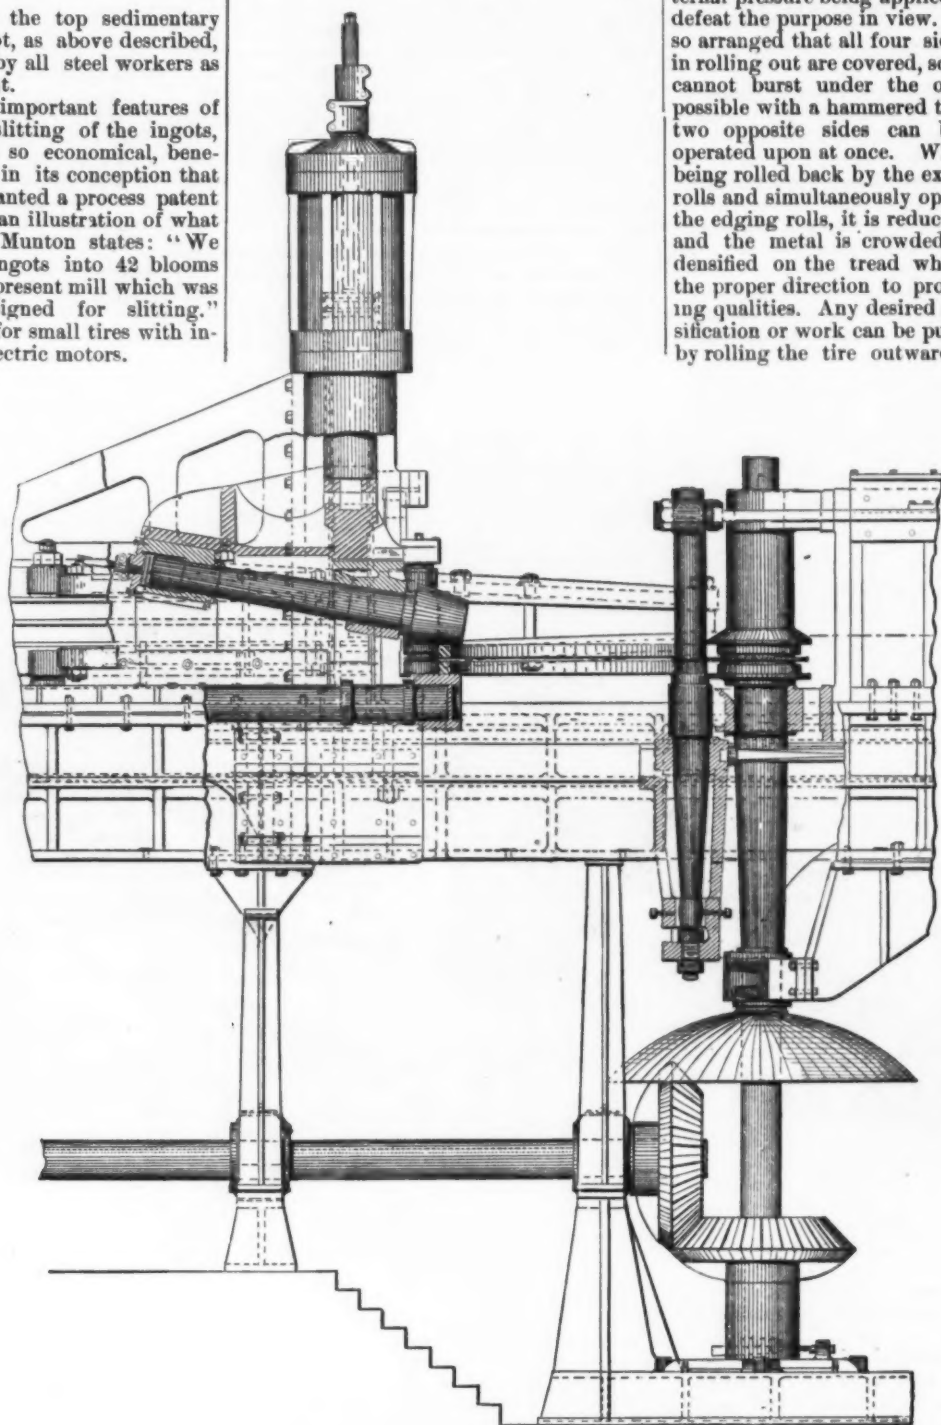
Side Elevation, Showing Mill Engaged in Rolling a Pair of Tires.
